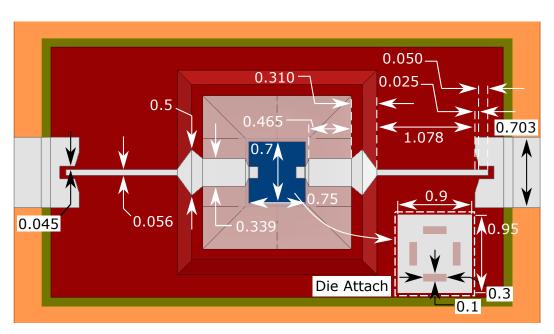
Overview of the designed package, with annotated dimensions in mm.
